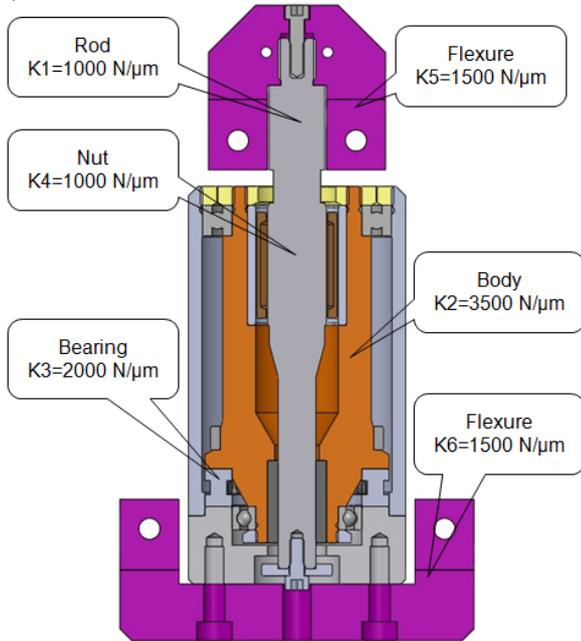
Micro-Controle[®] actuator for CLIC prototype two-beam module
